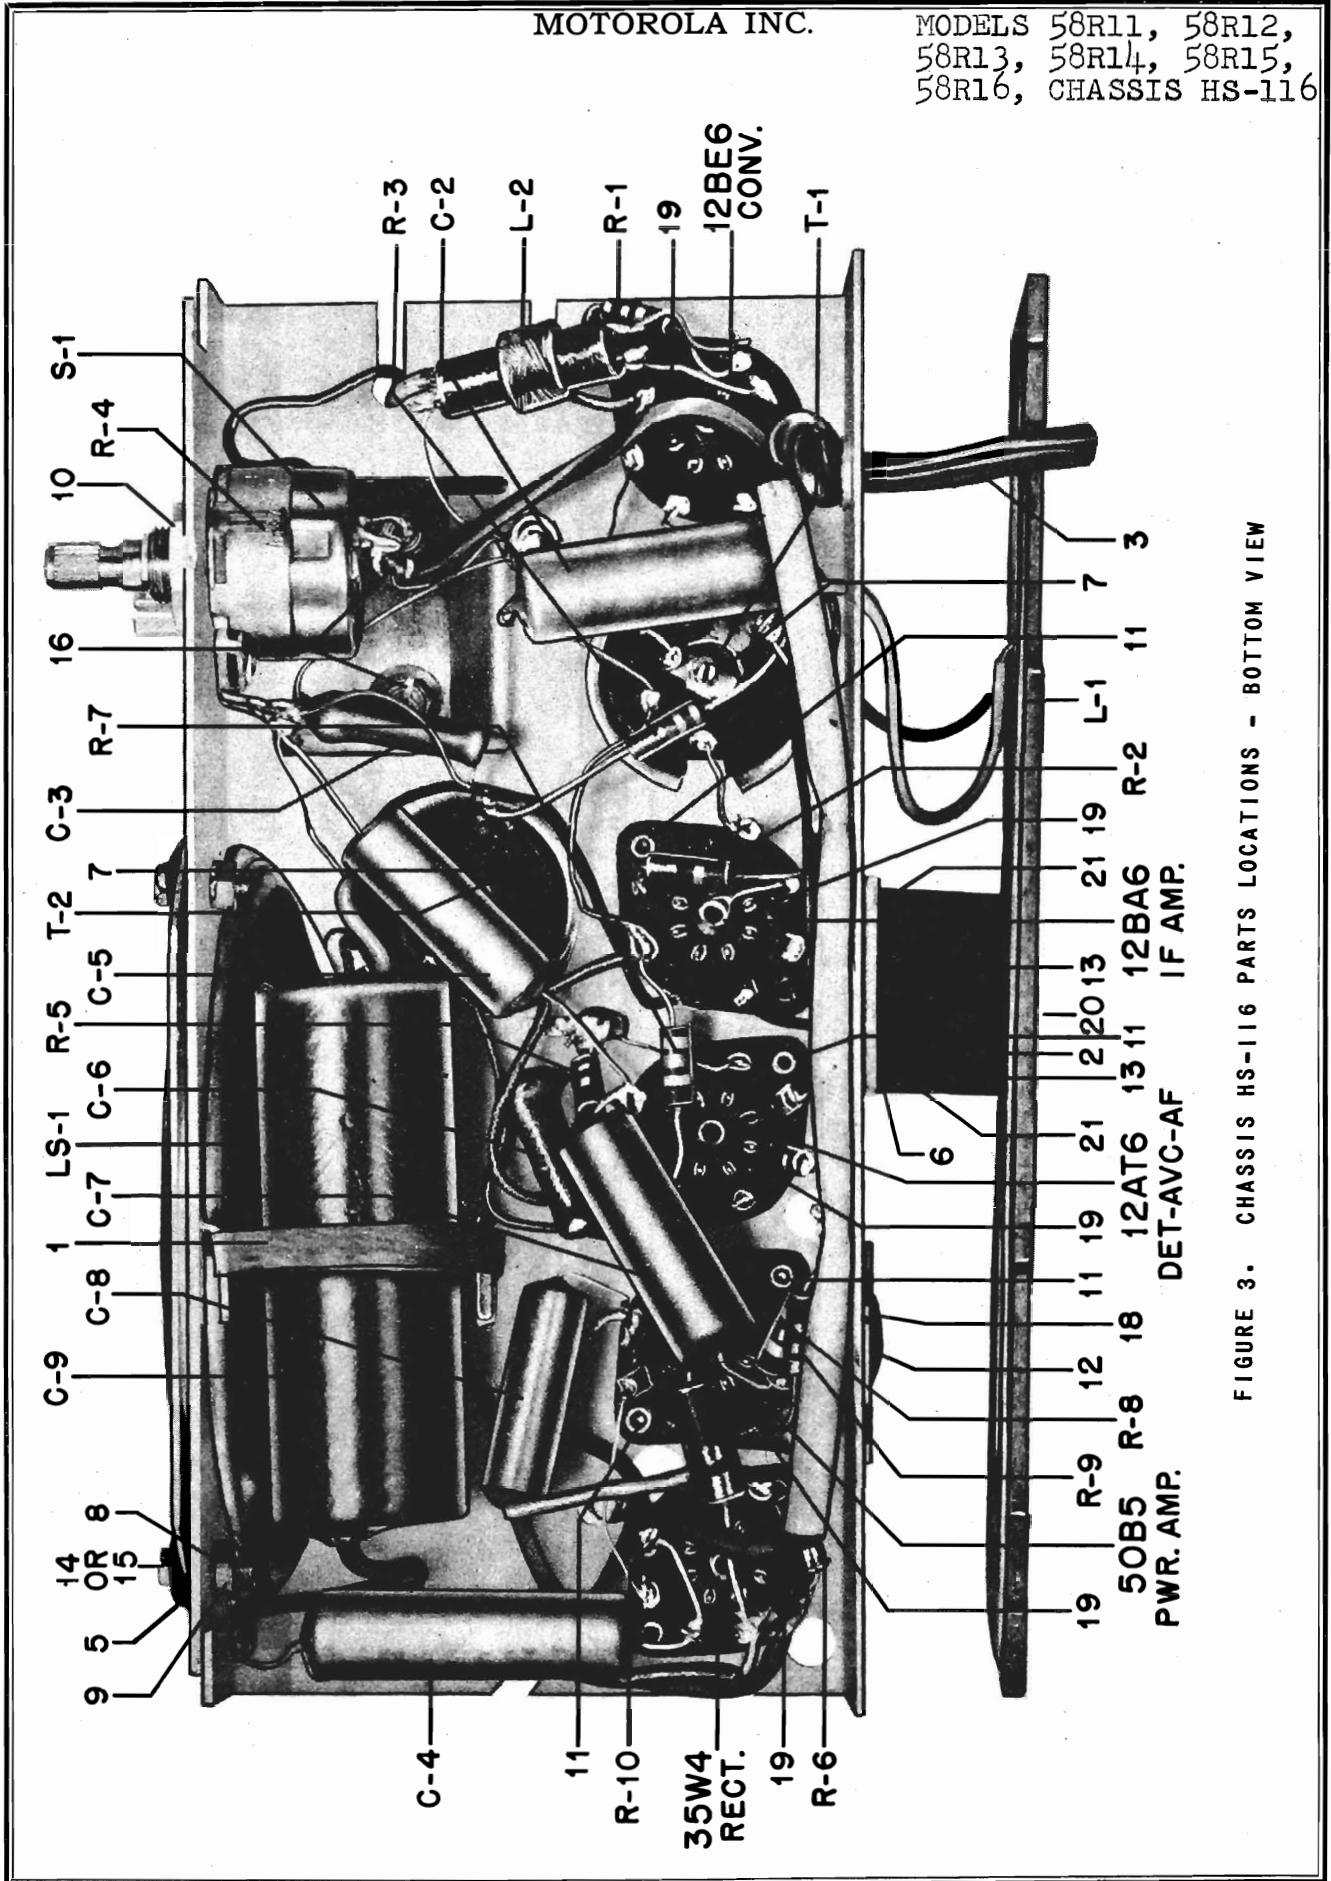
CHASSIS HS-116 PARTS LOCATIONS - BOTTOM VIEW
